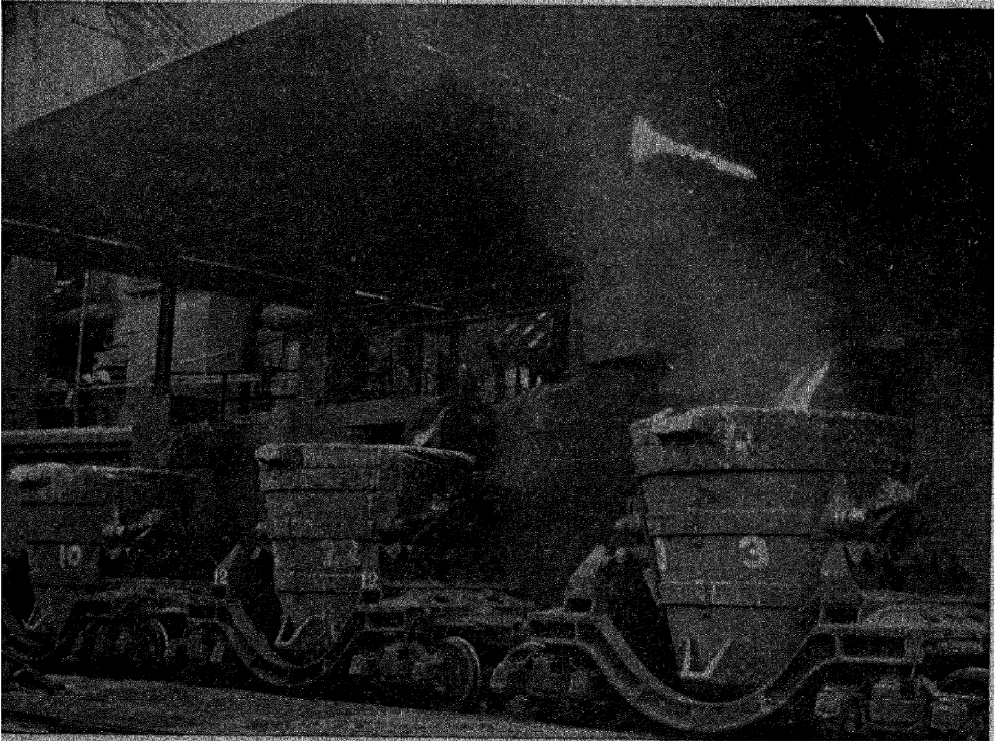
IX.—Pig ladles in the process of being filled. (*Courtesy of the Youngstown Sheet and Tube Company.*)
